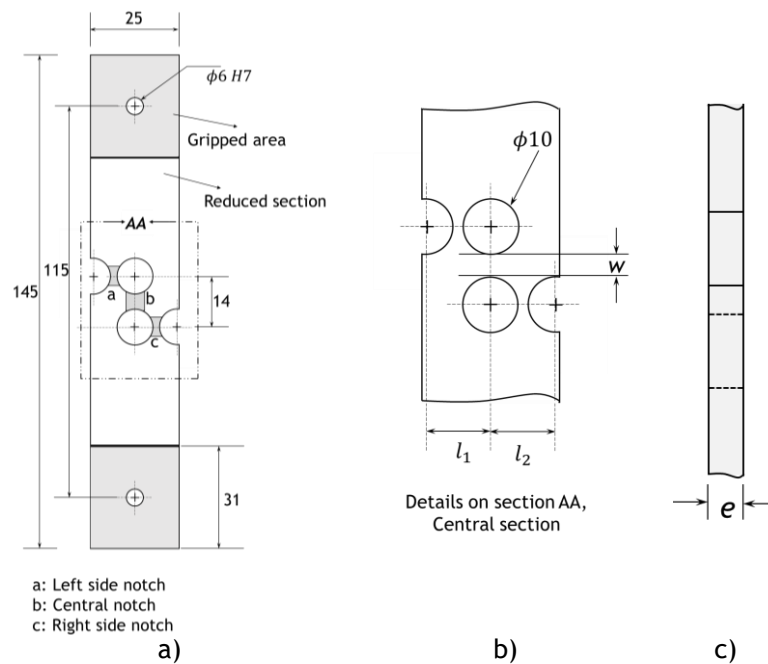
Standard bi-failure specimen: a) a general view, b) front view on the central section and c) side view of the central section, values are in mm.
